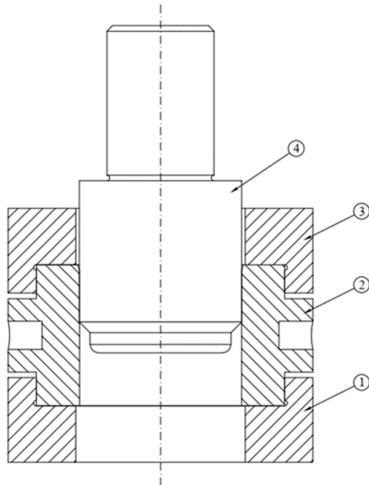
Layout of the shrink assembly that is the object of the analysis with finite elements (1 - support ring; 2 - pressing ring; 3 - centering ring; 4 - pressing hub)
